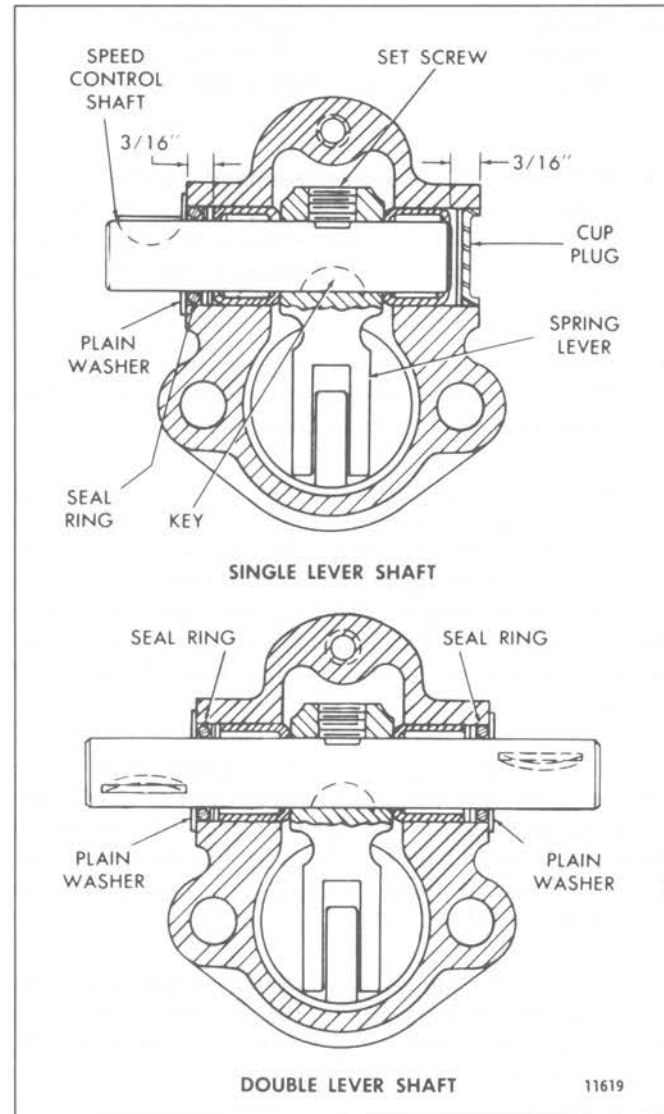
Cross Section of Governor Variable Speed Spring Housing
